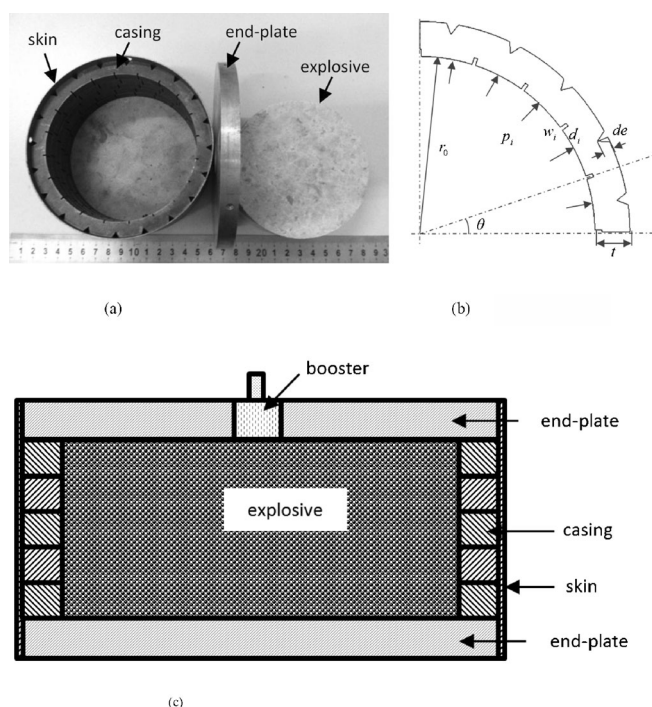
Specimen and assembly schematic of the experiments: (a) photograph of the experimental set-up consisting of cylindrical explosive, casing, skin, and end-plate. (b) Geometric parameter of the casing specimen. (c) Assembly schematic of the experimental set-up.
